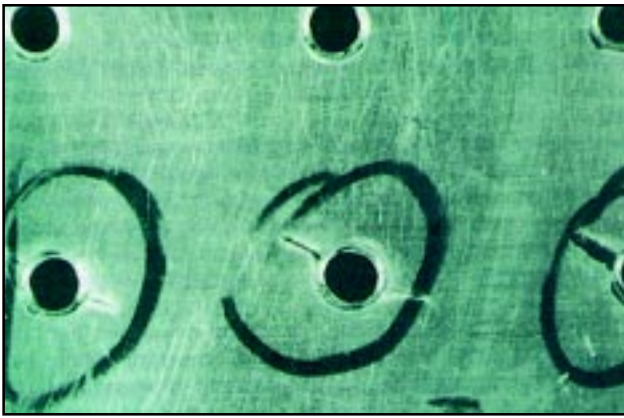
Multiple fatigue cracks found at countersunk fastener holes during a teardown inspection of a US Air Force KC-135 tanker aircraft. (The cracks can be seen extending from each of the circled holes at the 10 o'clock and 4 o'clock positions.)
